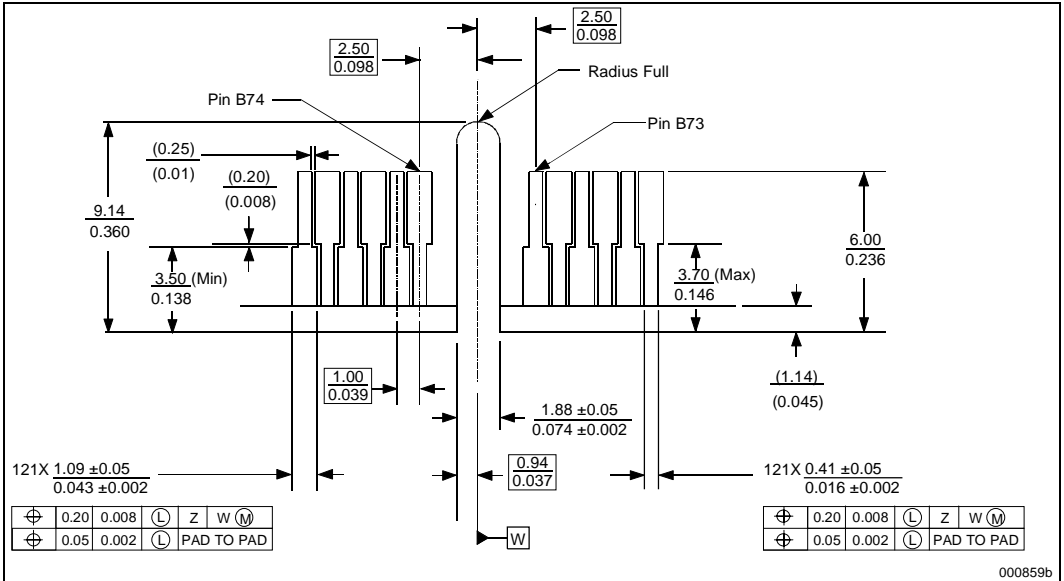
Substrate – Edge Finger Contact Dimensions, Cover Side View (Detail)
